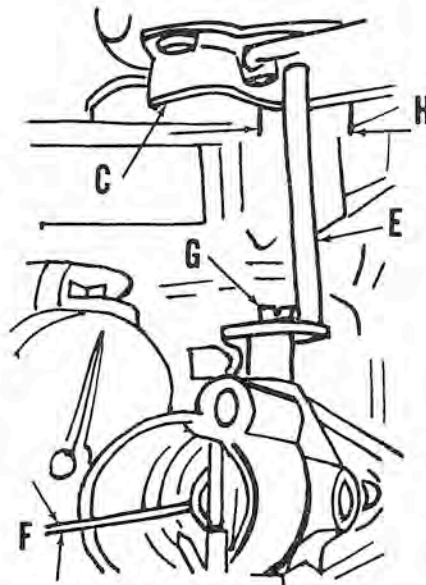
B—Move speed control lever until throttle shaft (E) is in economy position (H). Loosen the screw (G) and reposition throttle shaft until a clearance of 0.089 exists between edge of throttle and carburetor throat as shown at (F). Clearance can be measured using a No. 43 drill.
